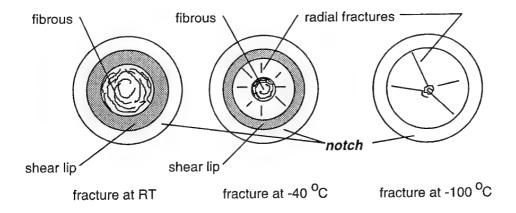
Fracture progression in notched tensile specimens, after Larson and Carr [13].
